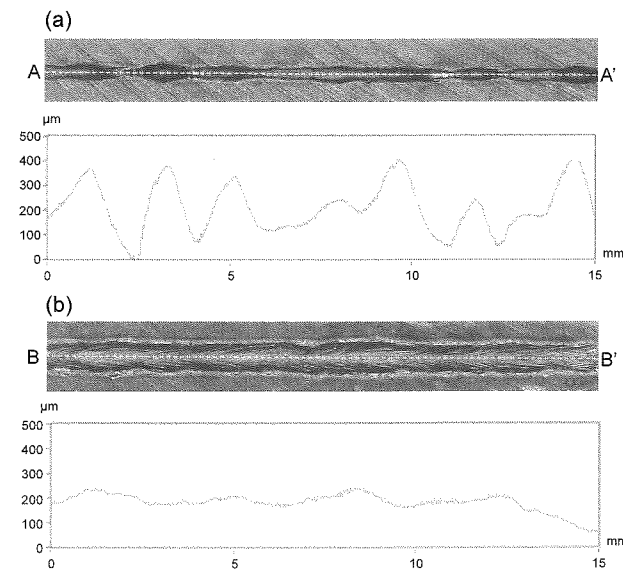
Weld bead appearances and bead surface profiles of stainless steel using (a) conventional single spot and (b) beam mode control.
